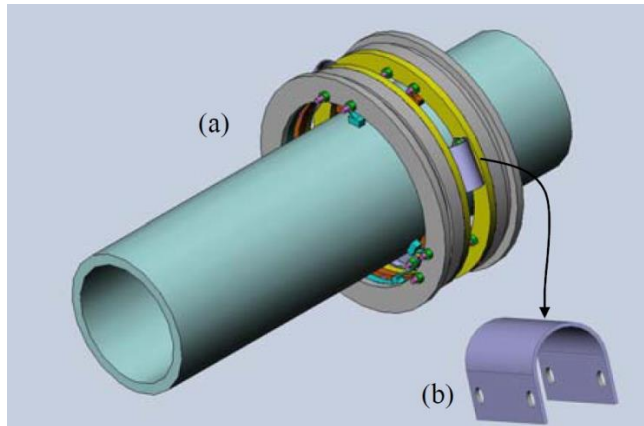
, 3D model of the compliant mechanism of SMA-actuated pipe crawler, (a) crawling device with clamping rings, (b) SMA U-shape strips
